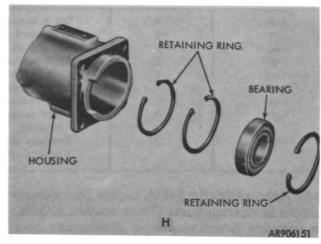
Traversing gearbox no-bak disassembly or assembly (2 of 2).
